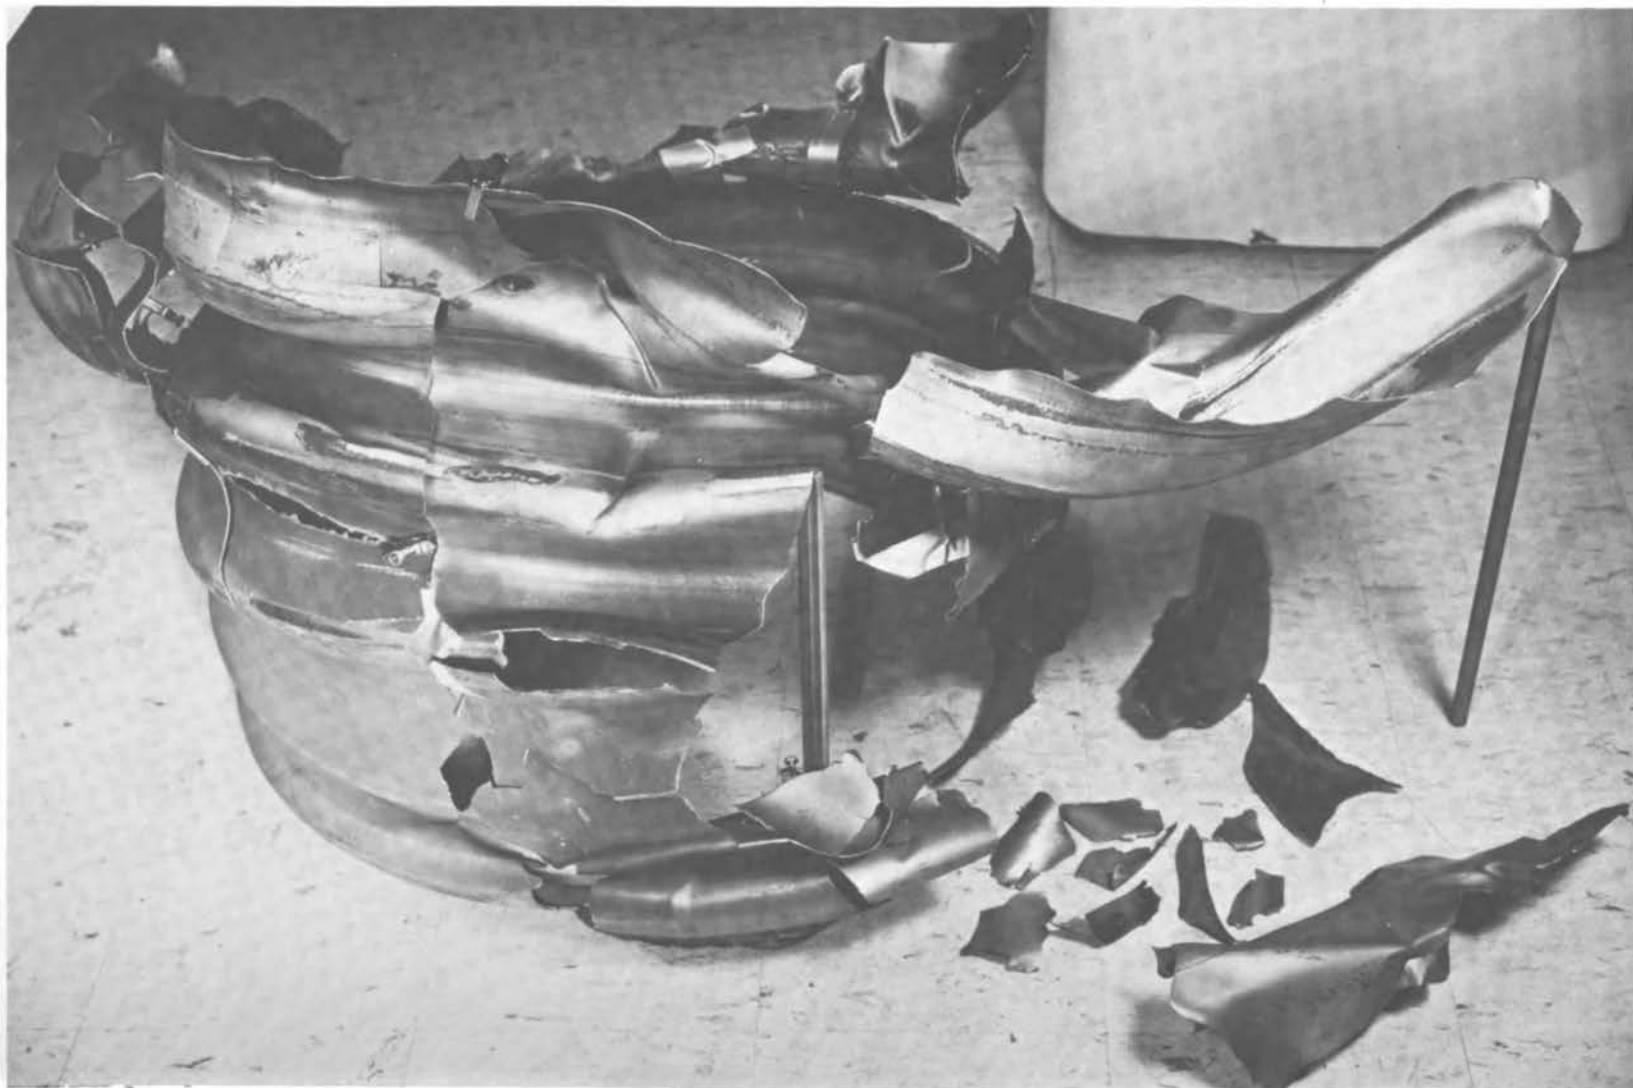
A Catastrophic Failure With No External Evidence of Corrosion. The appearance of the submitted sections of an expansion joint, after assembling a number of pieces with tape and clamps, is shown.
